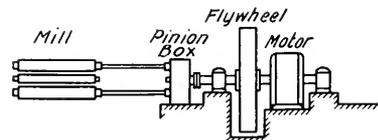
Layout of a Three-high Non-reversing Rolling Mill Driven by an Induction Motor Equipped with a Flywheel
